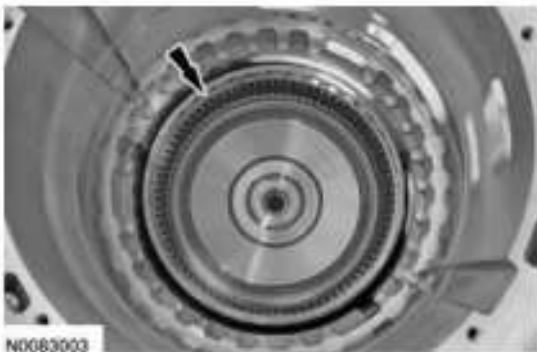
Locating Planet Carrier Hub And Output Shaft Assembly
